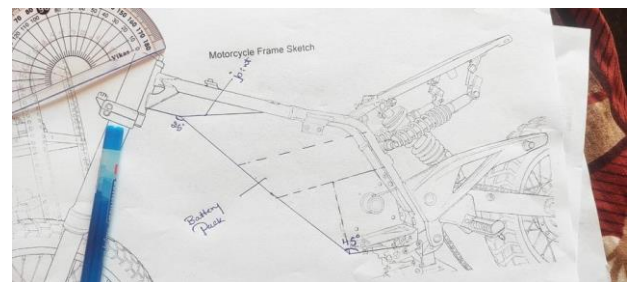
Motorcycle frame sketch used as the basis for chassis fabrication.
